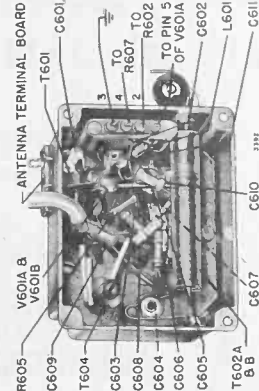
Bottom View of FM Tuner Sub-chassis. Location of components shown.
